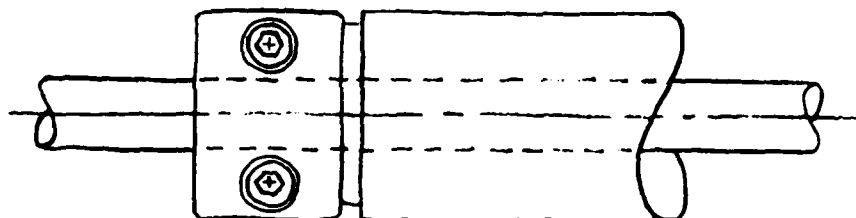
MORRISON INTERFERENCE CABLE SEAL AND REPEATER HOUSING ASSEMBLY
